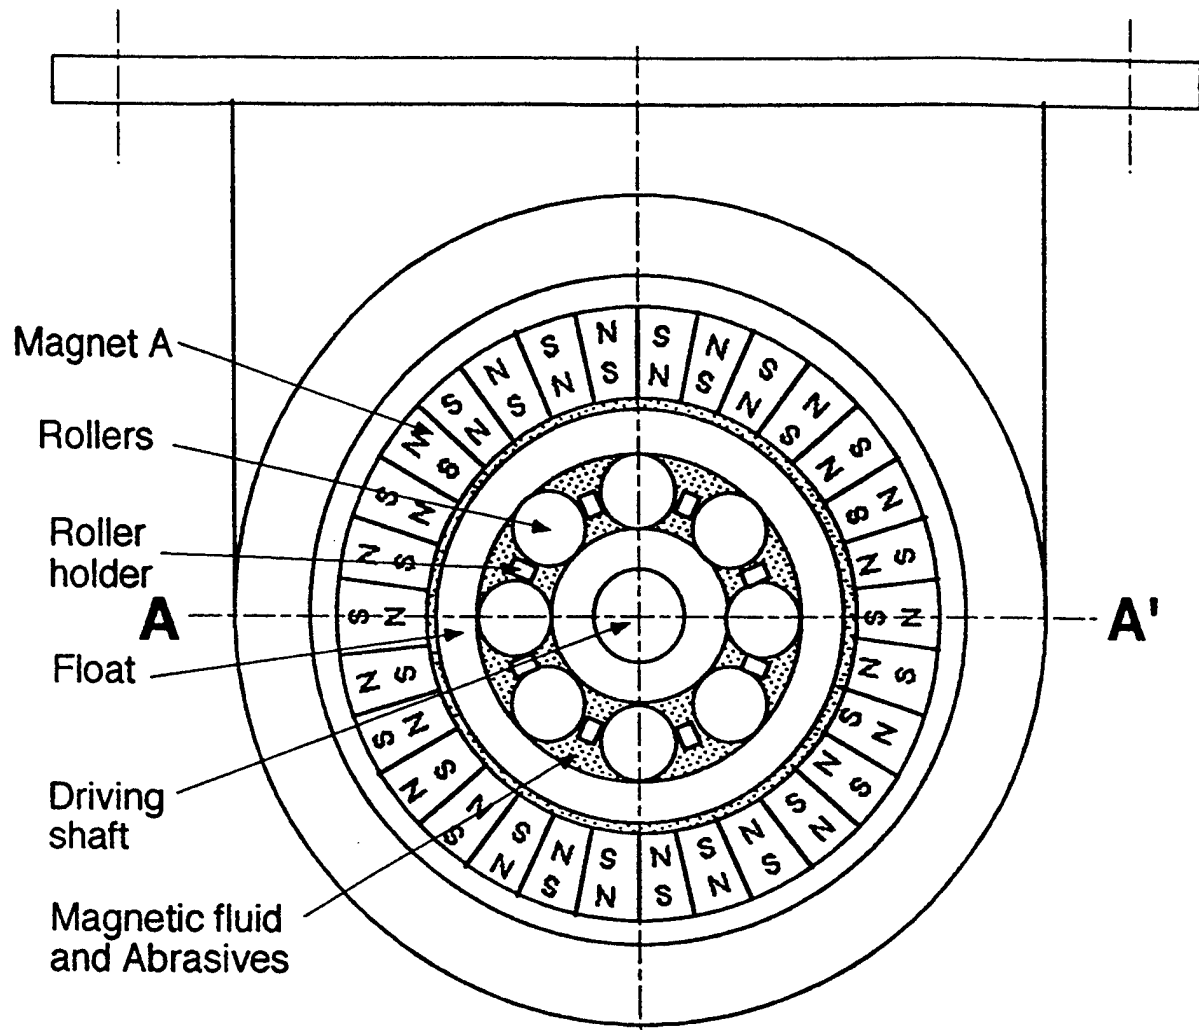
(a) A top view of magnetic fluid grinding equipment for ceramic rollers
